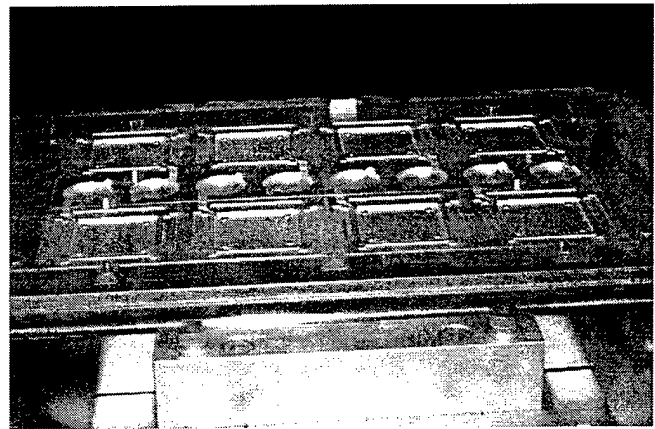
Photo of the unmodified lower mold platen showing the eight lead frame positions and the base of the eight ram cylinders used to heat and press the mold compound. One flow channel connects each base of the ram to each mold section to carry the mold compound to the parts during pressing.
